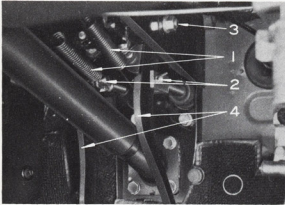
Clutch & Brake Pedals Removal V1265
